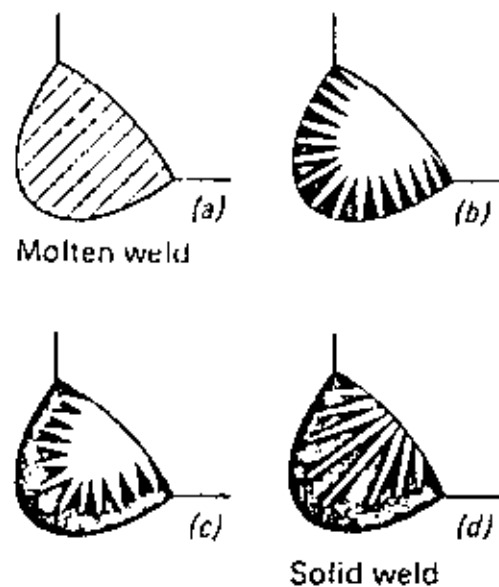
A molten fillet weld (a) starts to solidify along the sides next to the plate (b). Solidification proceeds as shown in (c) and (d).
